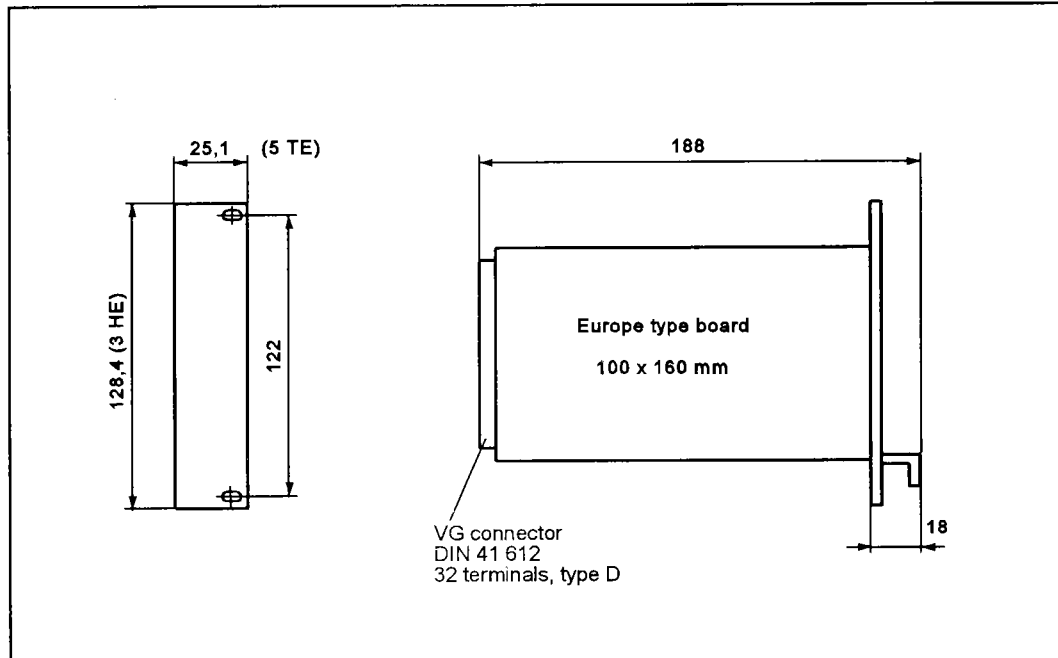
Dimensions ZMP 92-70 and ZMP MINI 92-70
